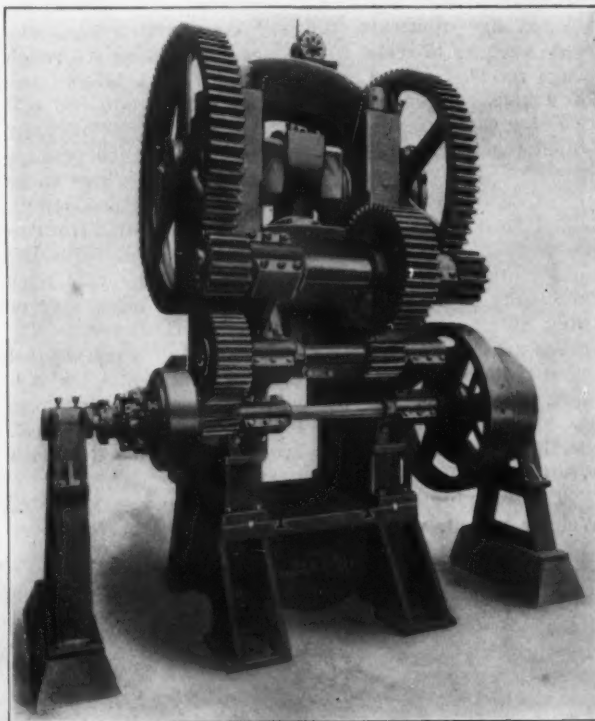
Rear View, Showing the Arrangement of the Gears.
